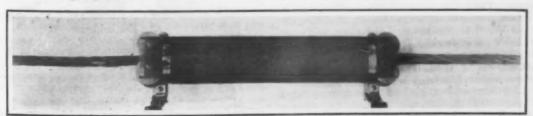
Cable Defectoscope Showing Cable Under Test Passing Through It
